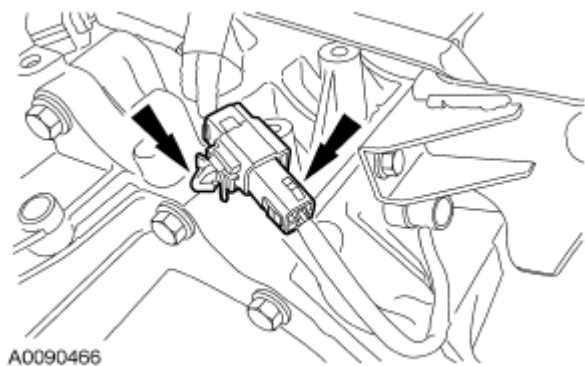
Locating Vehicle Speed Sensor (VSS) Electrical Connector
